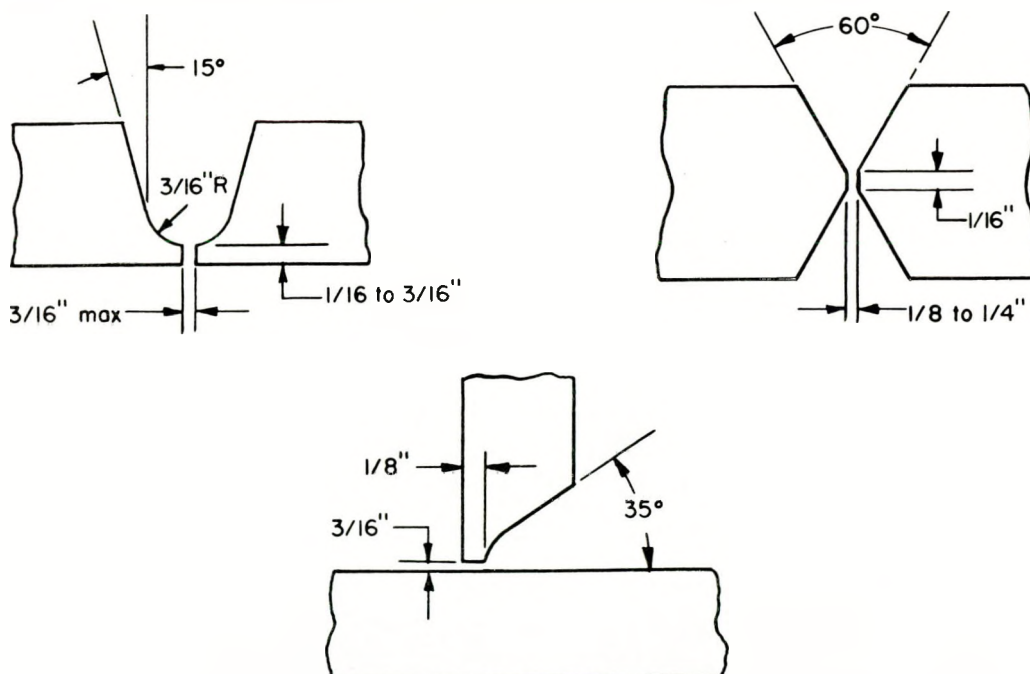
JOINT DESIGNS FOR SHIELDED-METAL-ARC WELDS IN PRECIPITATION-HARDENING STAINLESS STEEL, BASE METAL OVER 1/2 INCH THICK
